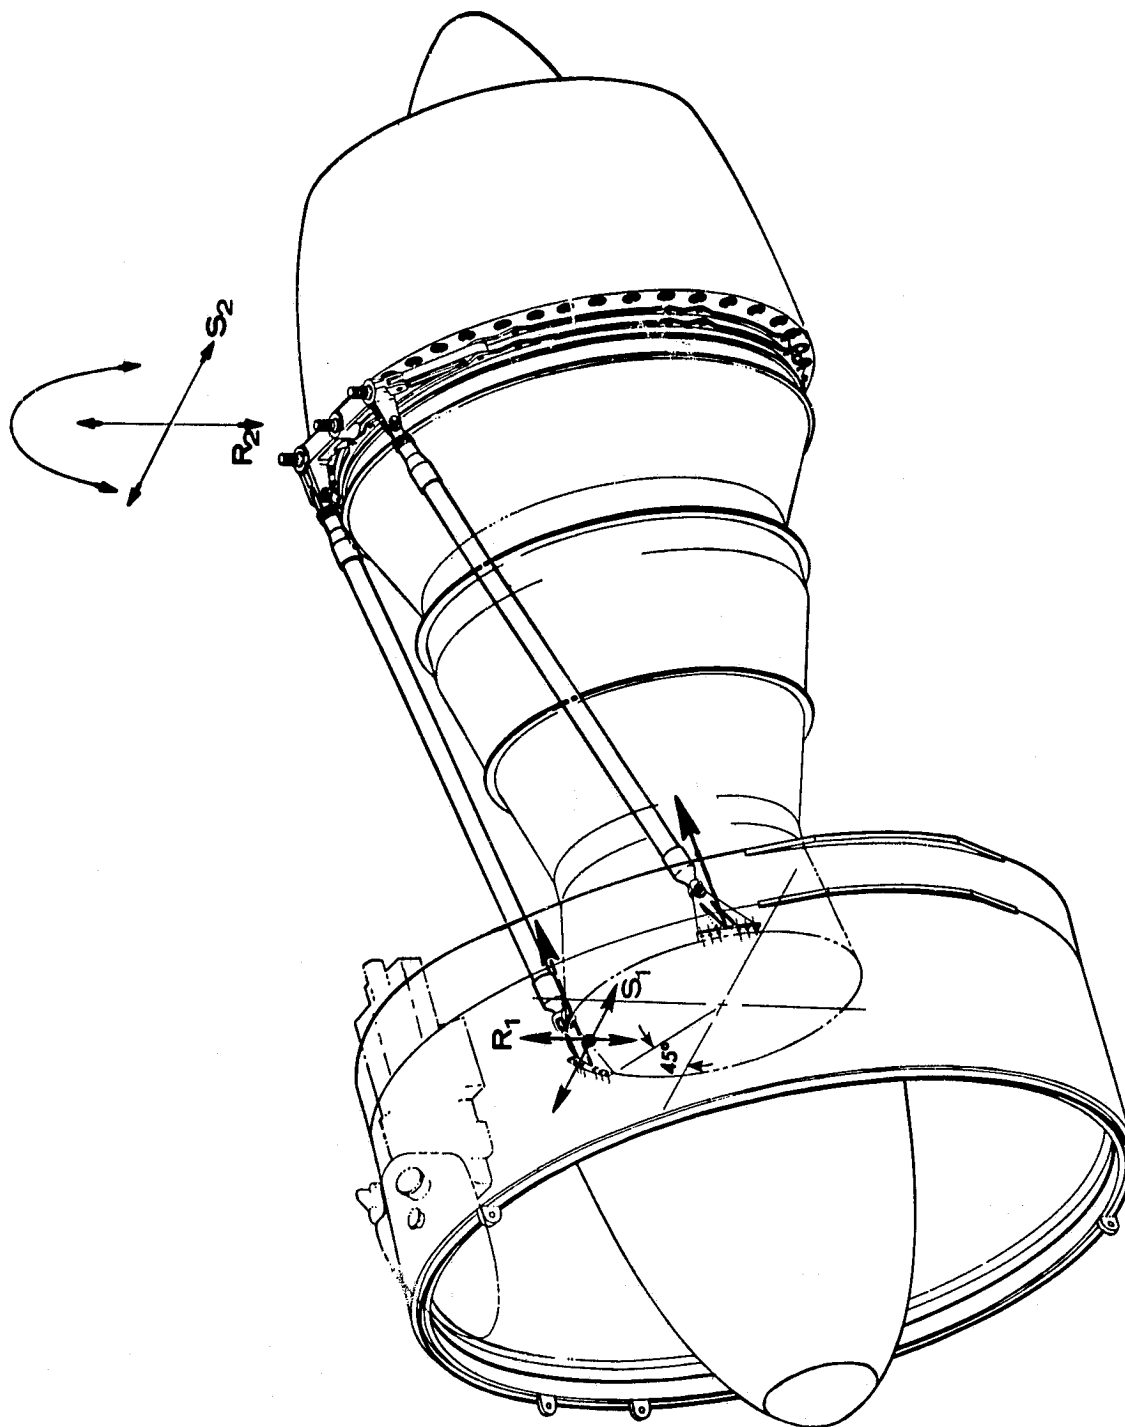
Mounting System used for UTW and OTW Experimental Engines and UTW Flight Engine.
